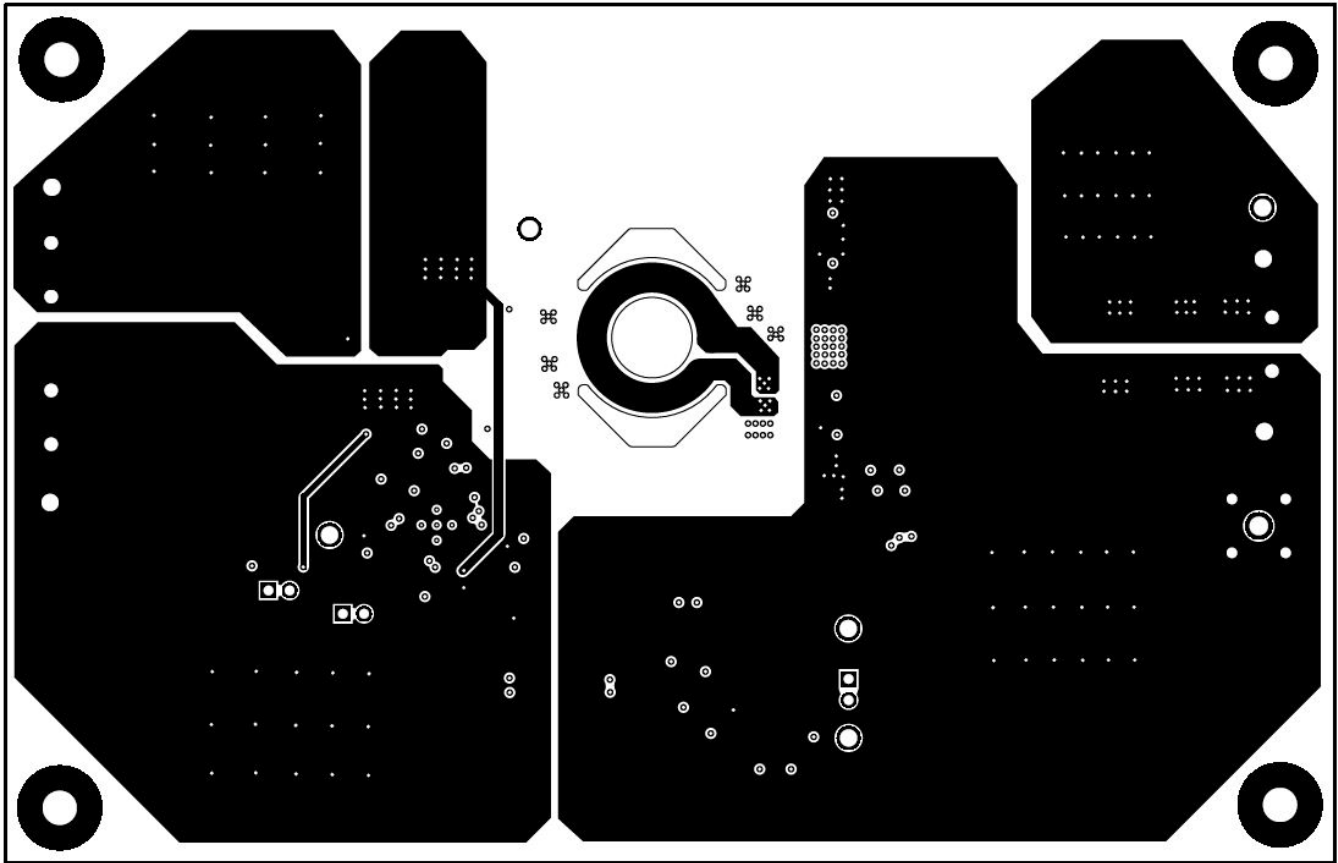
LM5036 EVM: Layer 6 PCB Assembly layout
